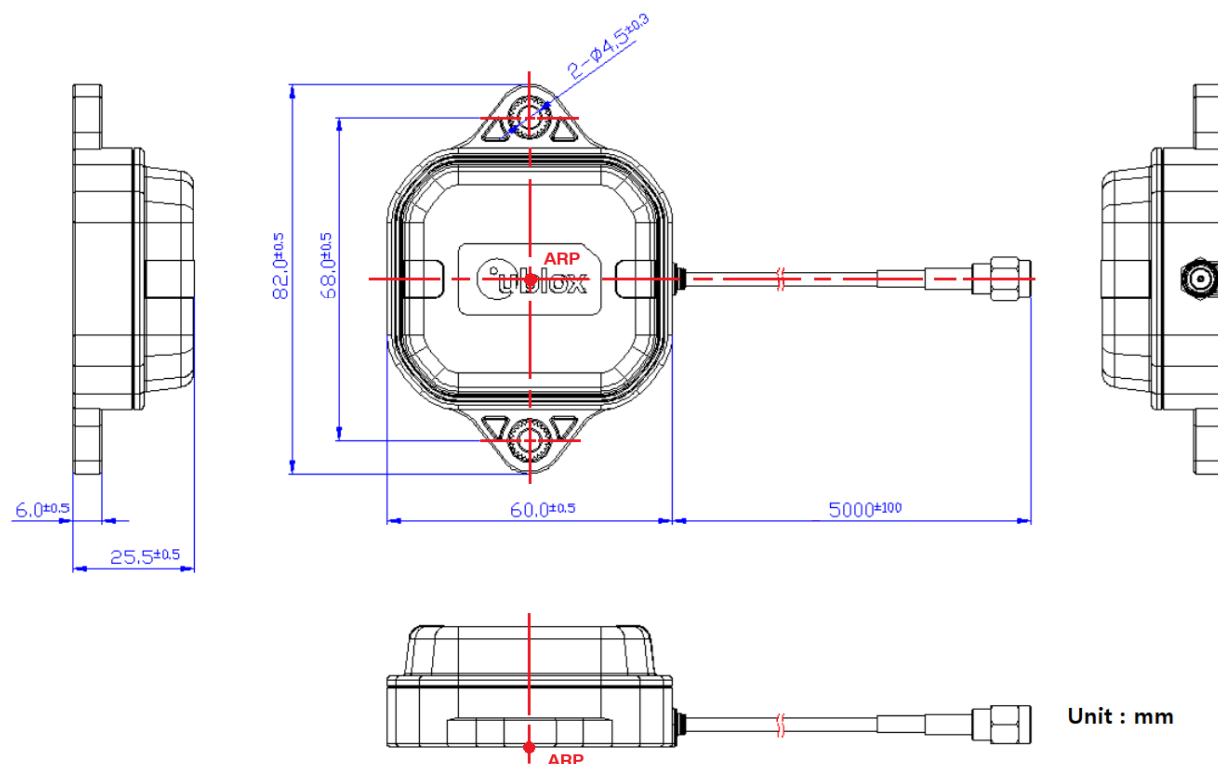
ANN-MB3 mechanical drawing. Dimensions are given in mm.
